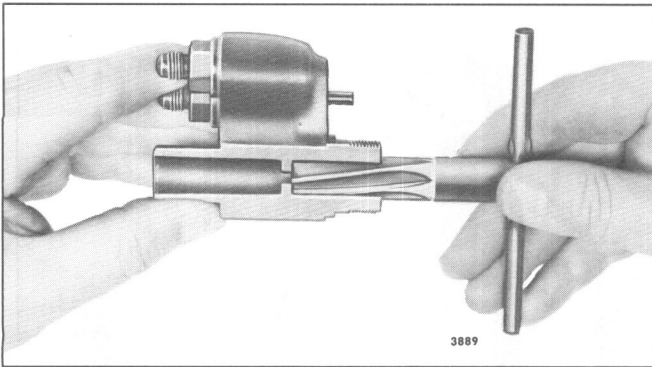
Cleaning Injector Body Ring with Tool J 21089
